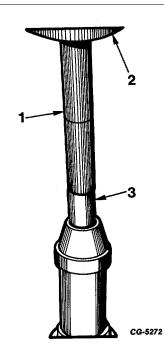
Installing Lower Bushing using Bushing Installer SE-1955-7
